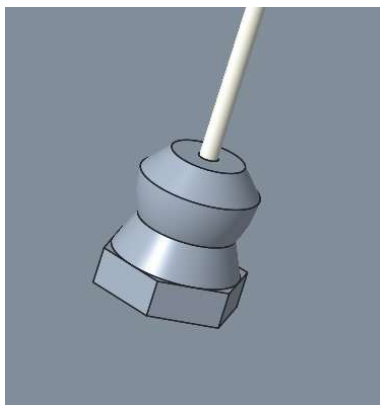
CAD Drawing of the reference electrode and the tube connector
